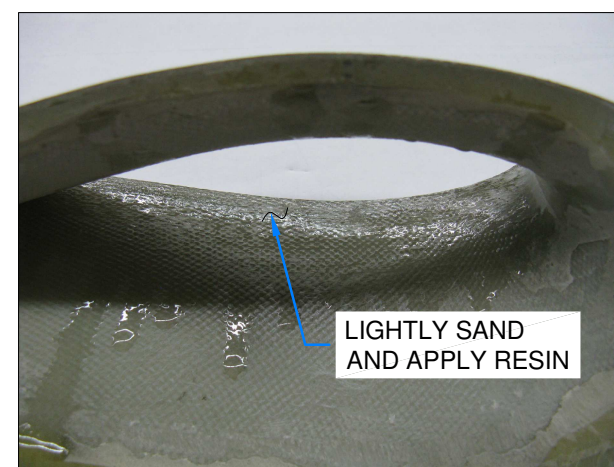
SAND INSIDE SURFACE AND APPLY RESIN
